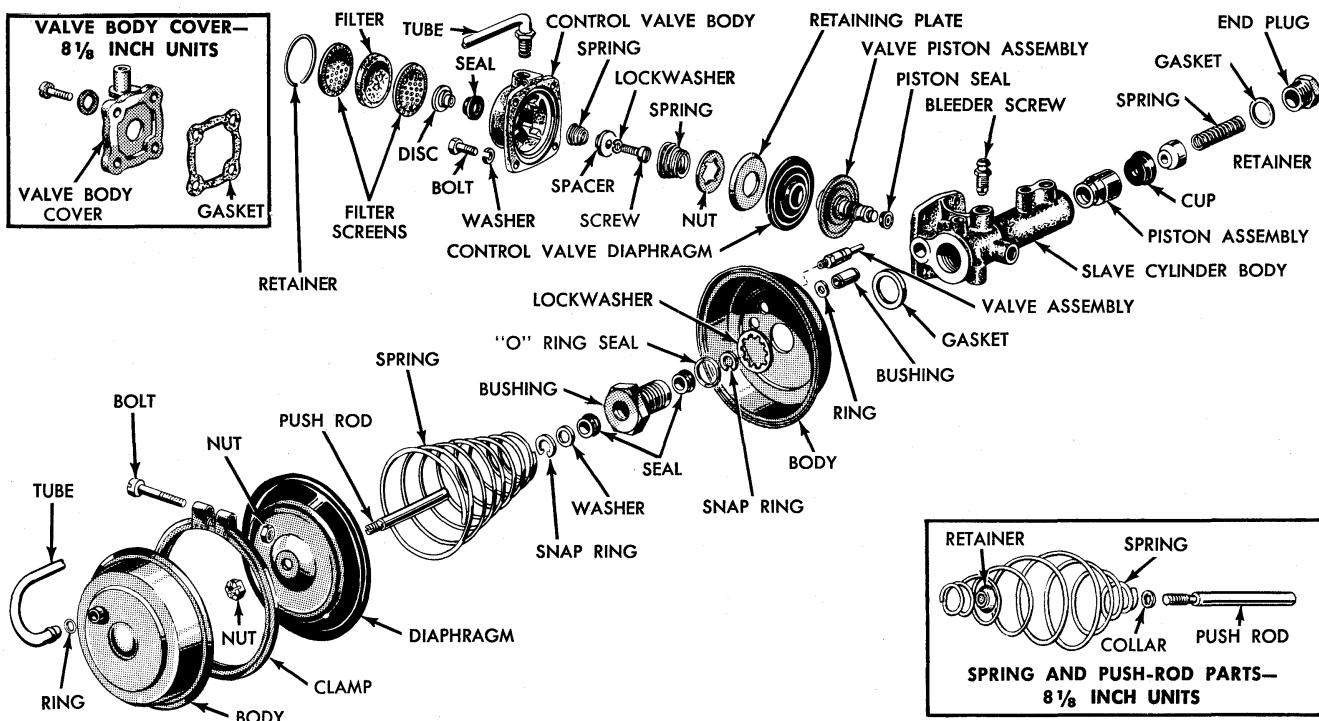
Disassembled Midland Hy-Power Vacuum Booster
